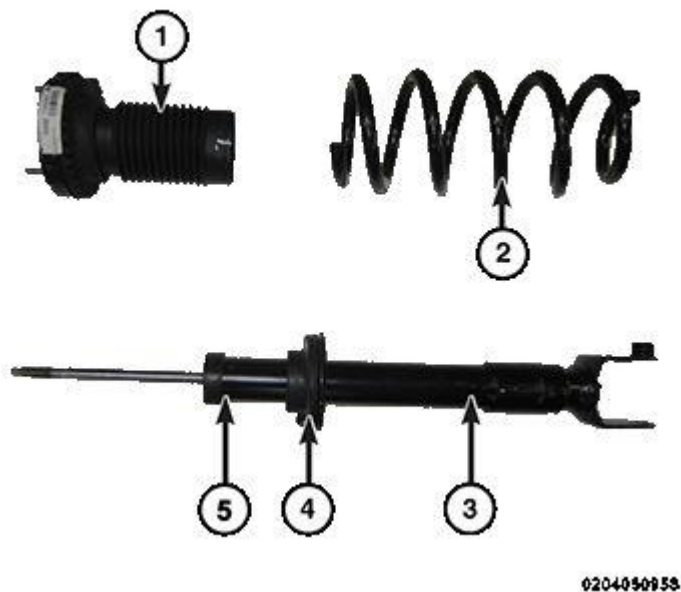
Coil Spring Isolators, Coil Spring & Shock
